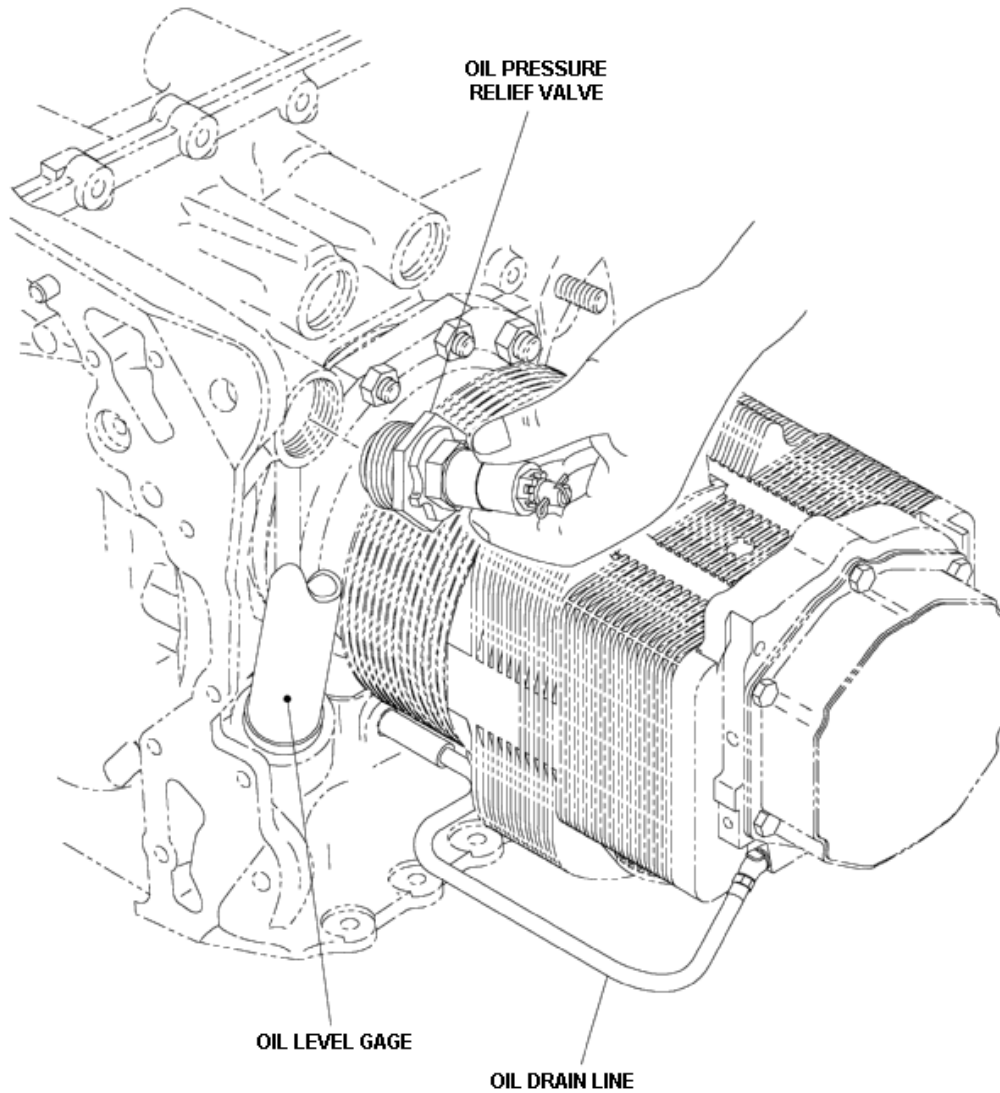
• Oil Filter and Adapter Assembly
